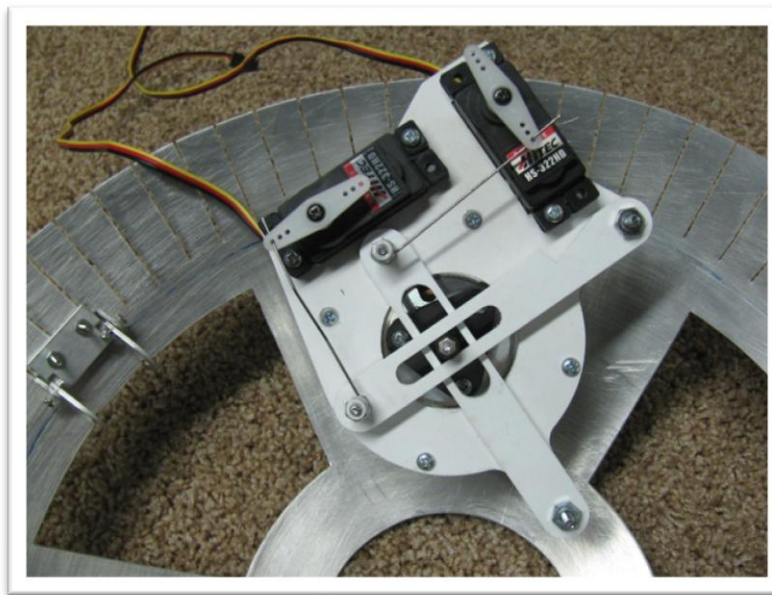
Holo-eye mechanism assembly - Photo by: Bob Ross
